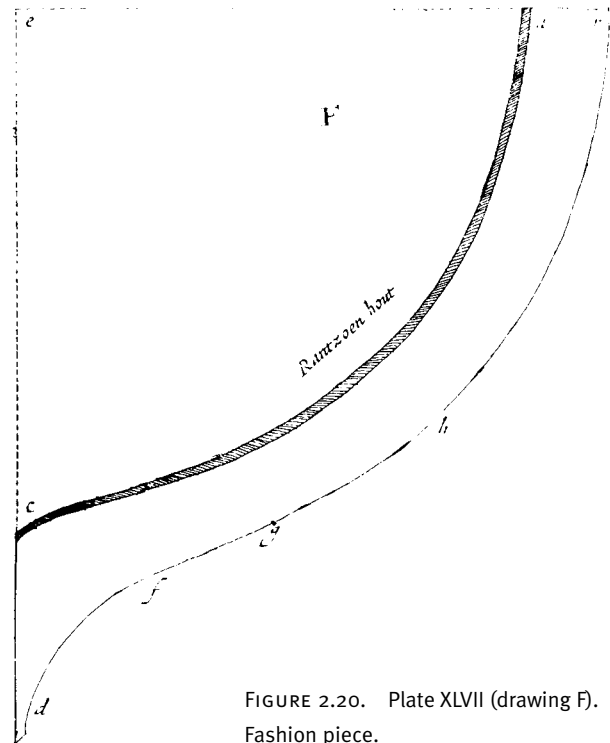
Plate XLVII (drawing F). Fashion piece.
